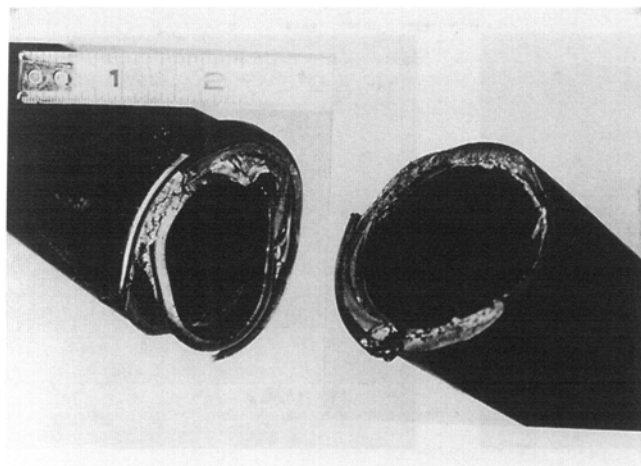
Actual failure morphology of the butt-fusion joined pipe
